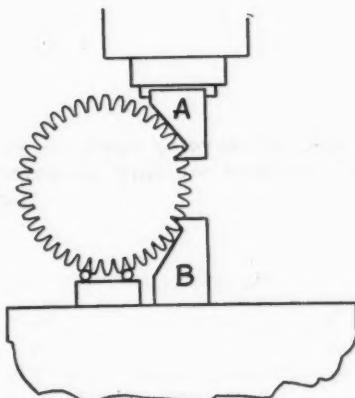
Apparatus devised for testing the resistance of gear teeth to fatigue fractures.
